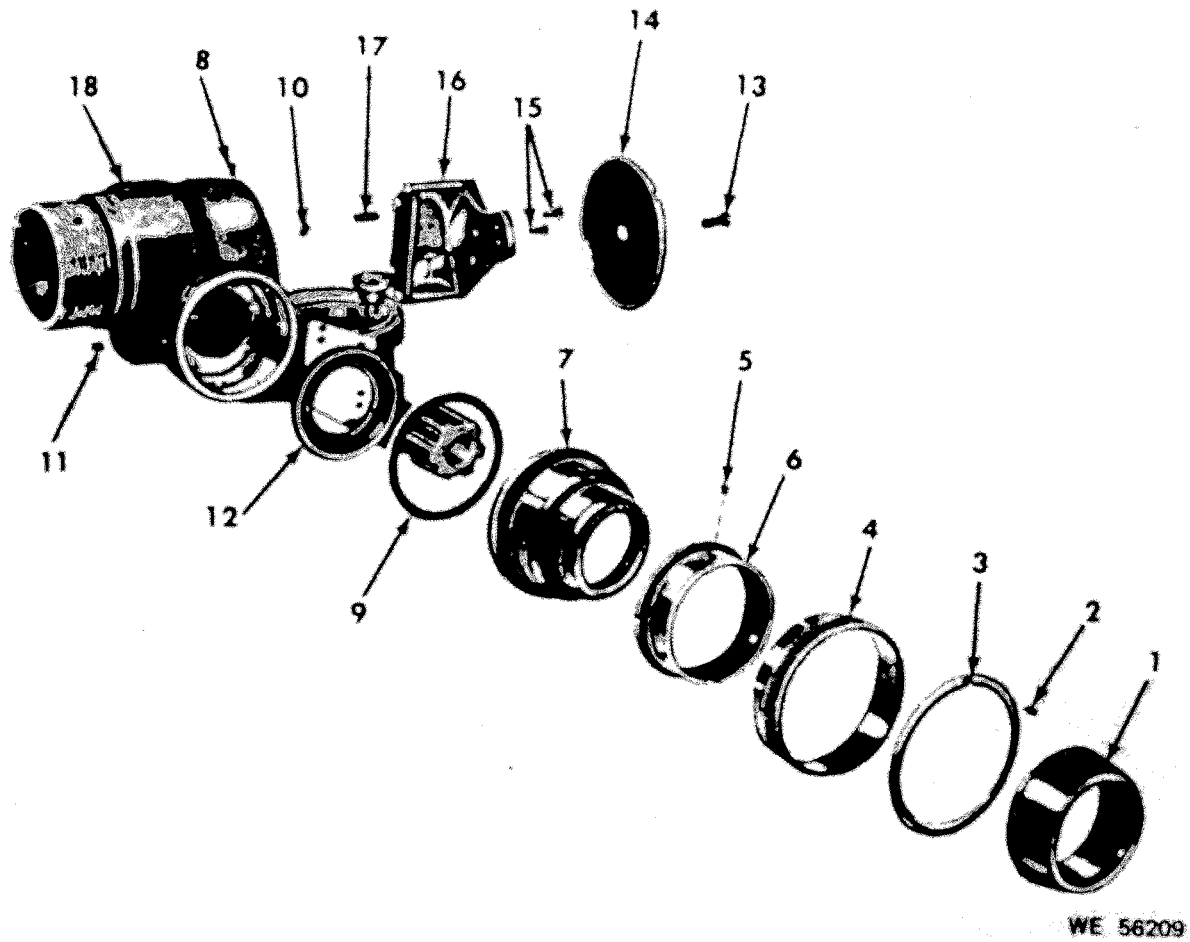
Right eyepiece assembly 8215543, reticle assembly 6180593, and right prism holder assembly 5582528-exploded view.
